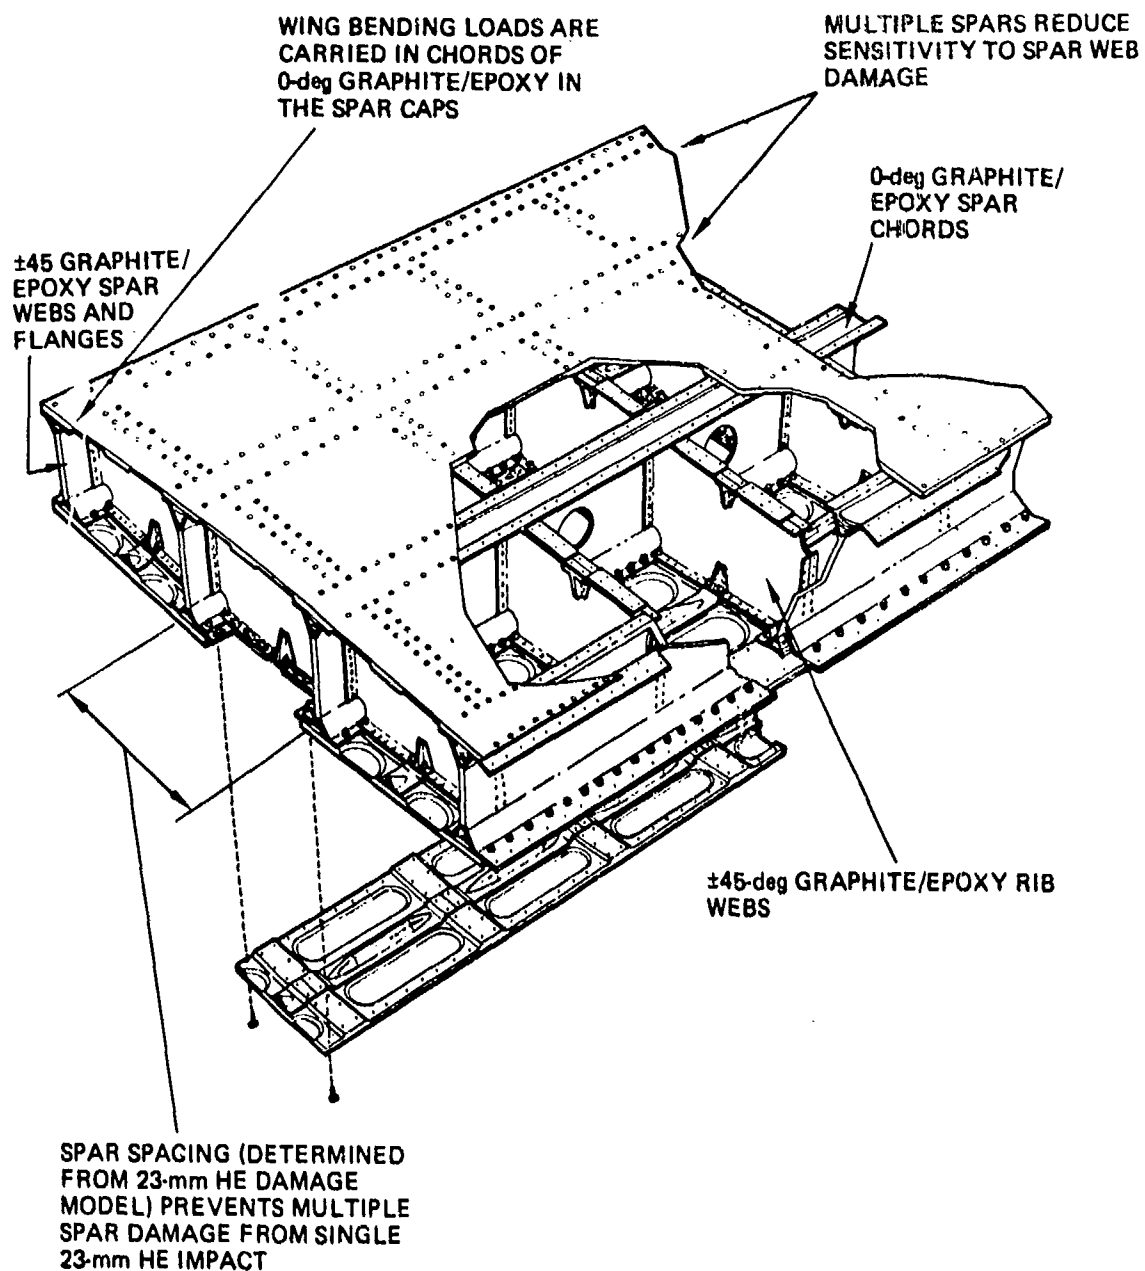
Battle-Damage-Tolerant Wing Final Design—Spars and Ribs
